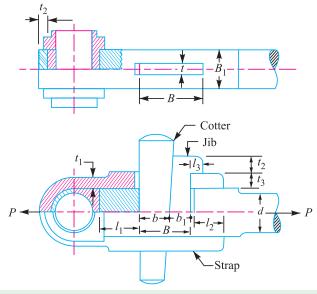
Gib and cotter joint for strap end of a connecting rod.
